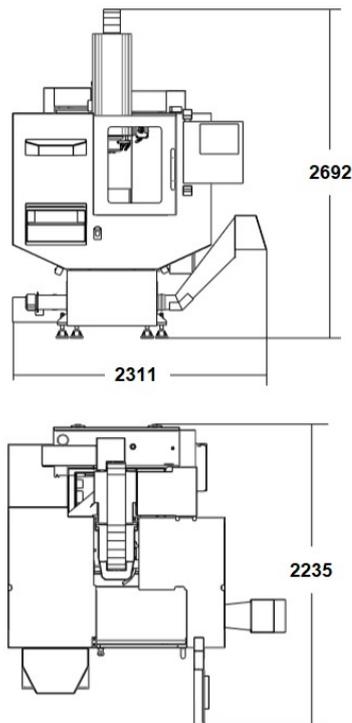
Overall dimensions of Haas Mini Mill CNC machine-tool [9].
